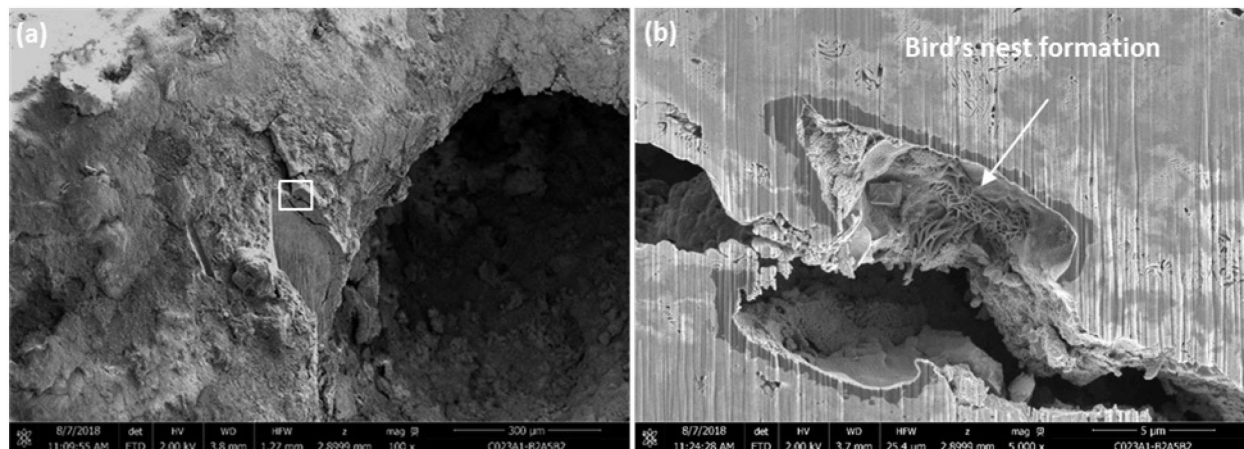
FIB Cross Section of the Tunnel Wall in C023A1-B2A5B2 at (a) 100× and (b) 5,000×
